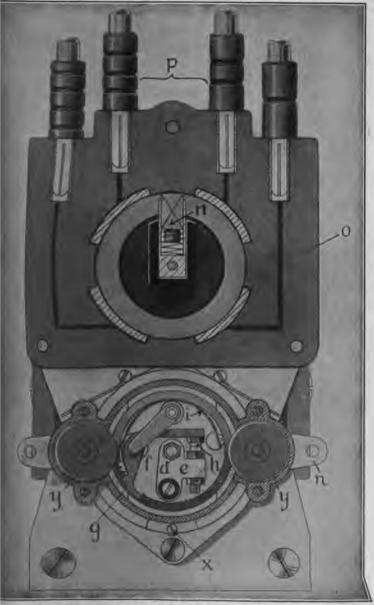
Sectional View of Bosch High Tension Magneto.
